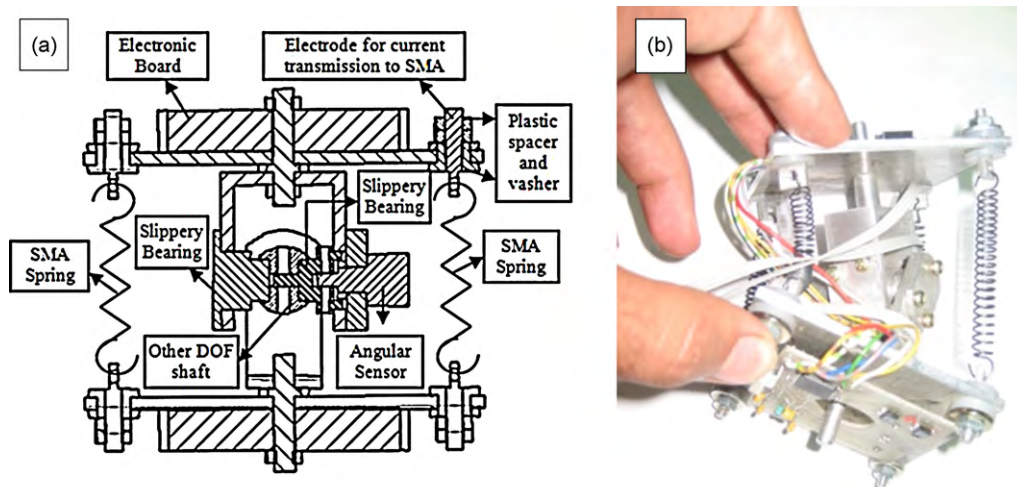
Detailed mechanical design of the FlexiBot (a) a cross-section of one of the DOFs and (b) the actual module.
